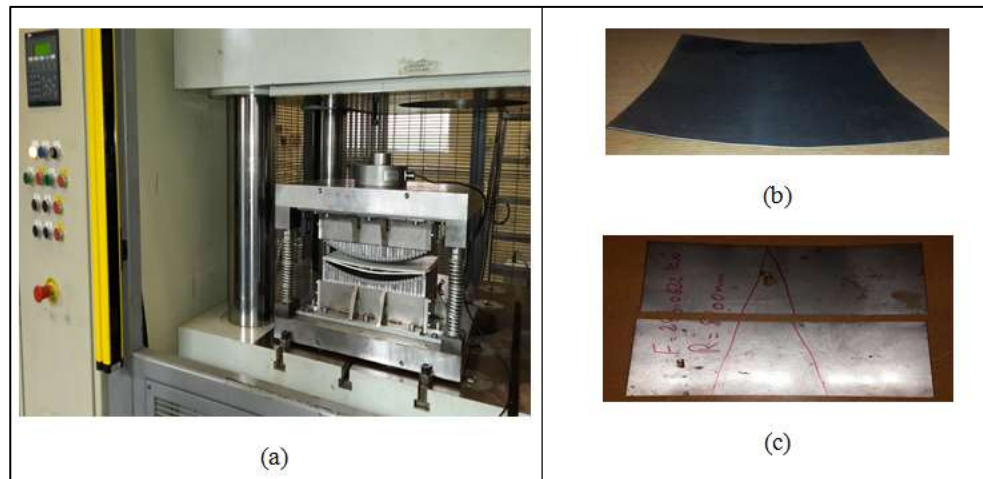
[111] (a) Multi-point forming die, (b) Fabricated part, and (c) Part cut into two halves
